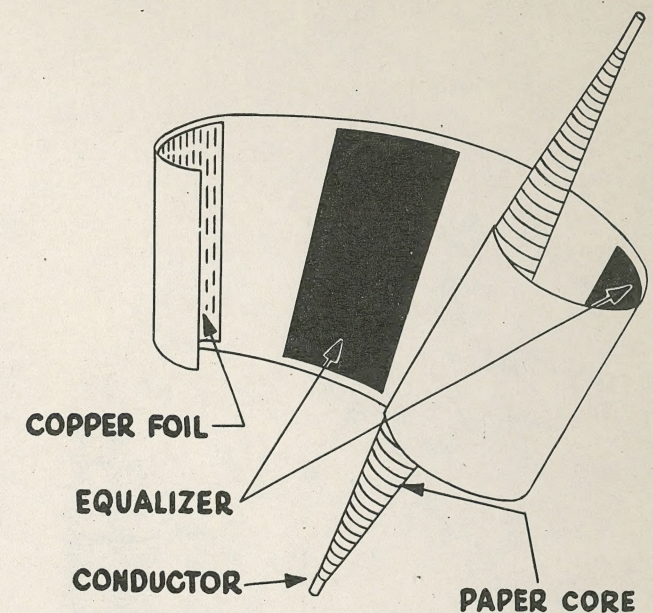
BUSHING CORE DESIGN UTILIZING FULL TURN EQUALIZERS.
